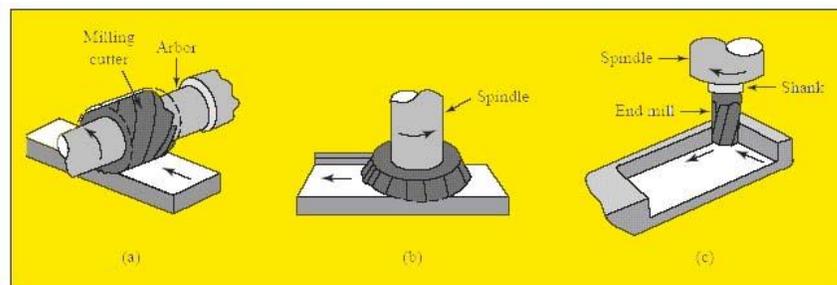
The three basic milling operations: (a) milling, (b) face milling, (c) end milling
